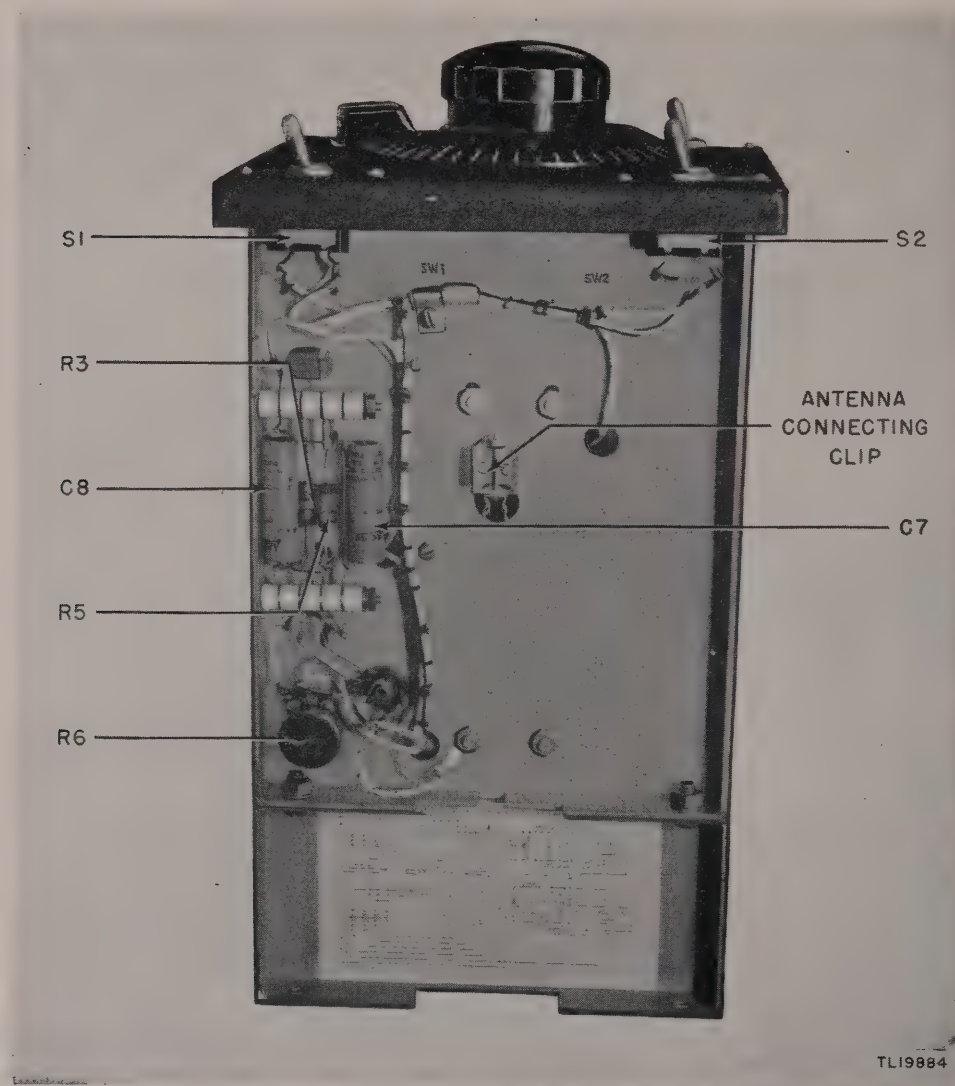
Radio Transmitter BC-1149-(*)(Target), bottom view of chassis.
